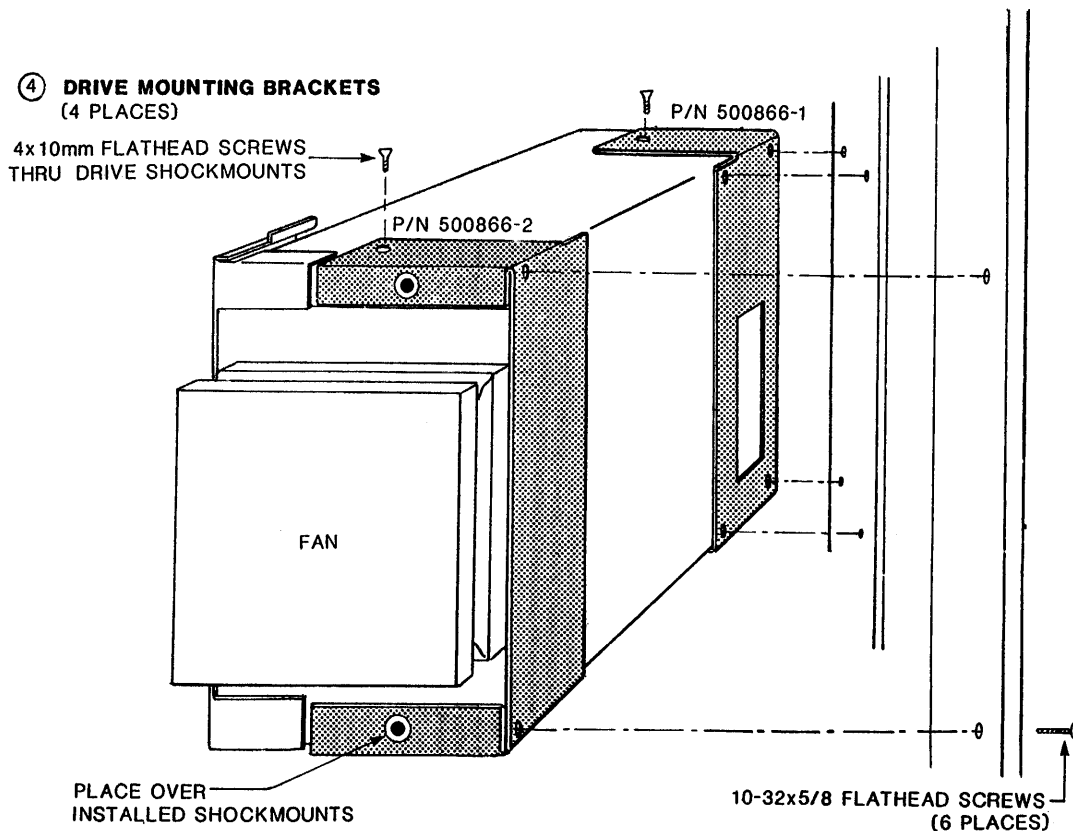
8" WINCHESTER MOUNTING BRACKETS
